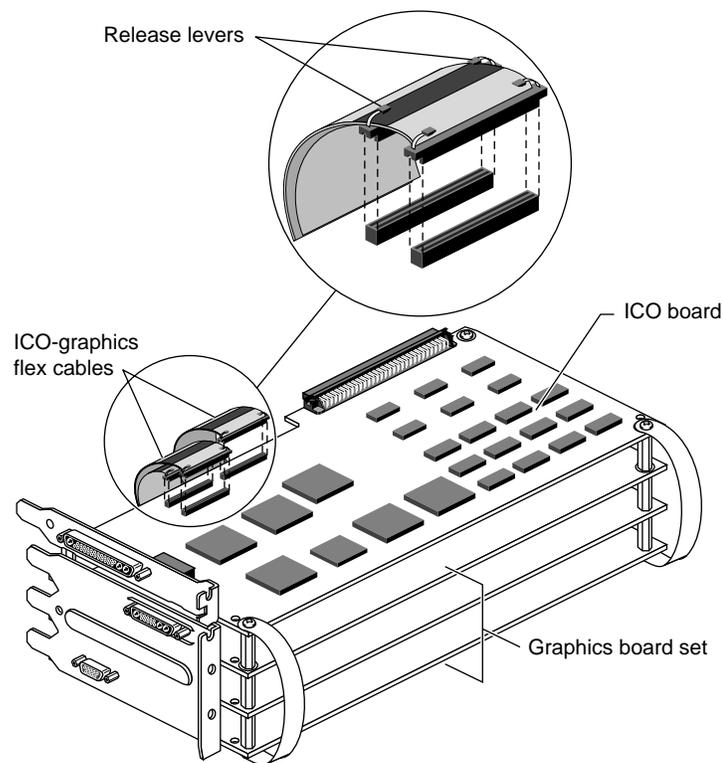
Attaching the ICO-Graphics Cables to the ICO Board
